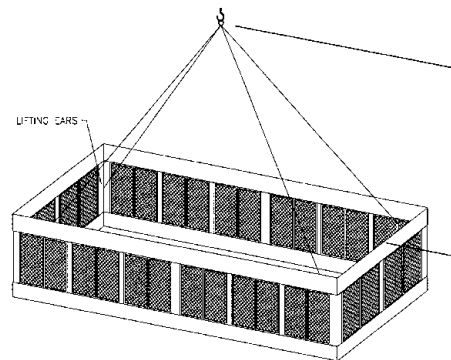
Bottom Section, UBT 8-318B through UBT 8-936B.
